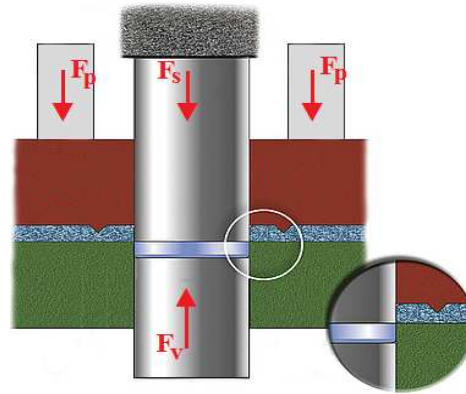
Schematic of the fine blanking process with a V-ring indenter:  $F_P$  – blanking punch force,  $F_V$  – ejector force,  $F_S$  – blanking force
